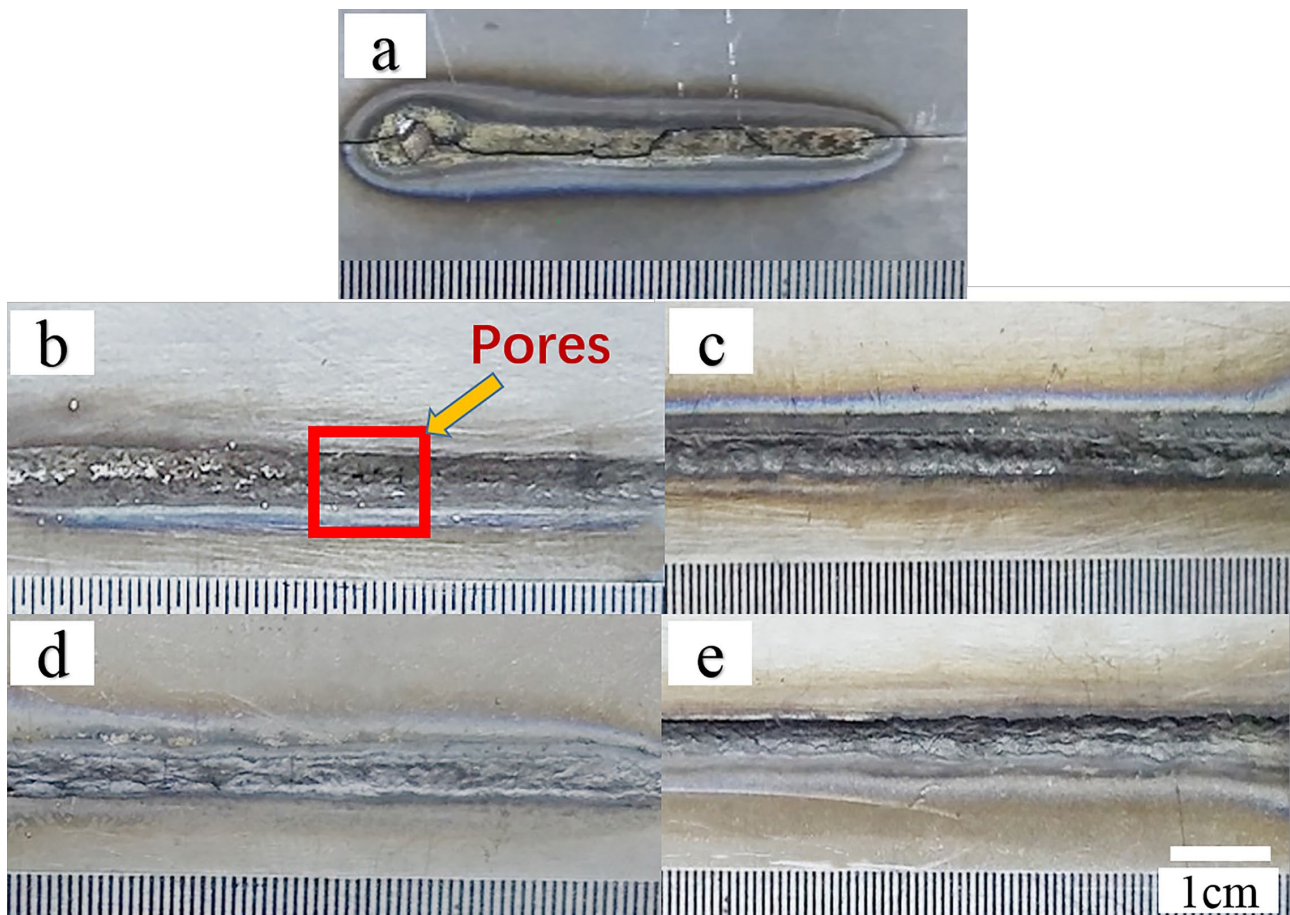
The macroscopic morphology of welding joints with copper layer under different laser powers: a) without Cu interlayers under laser power of 2300 W, b) 2100 W, c) 2300 W, d) 2500 W, e) 2700 W
